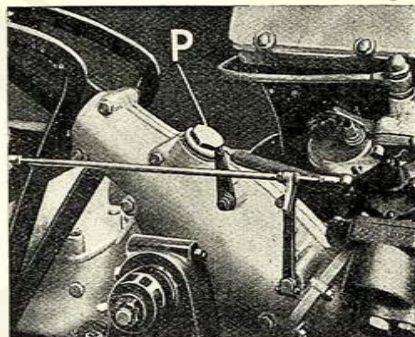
Keep the Steering Box well lubricated through the lubricator shown above.
